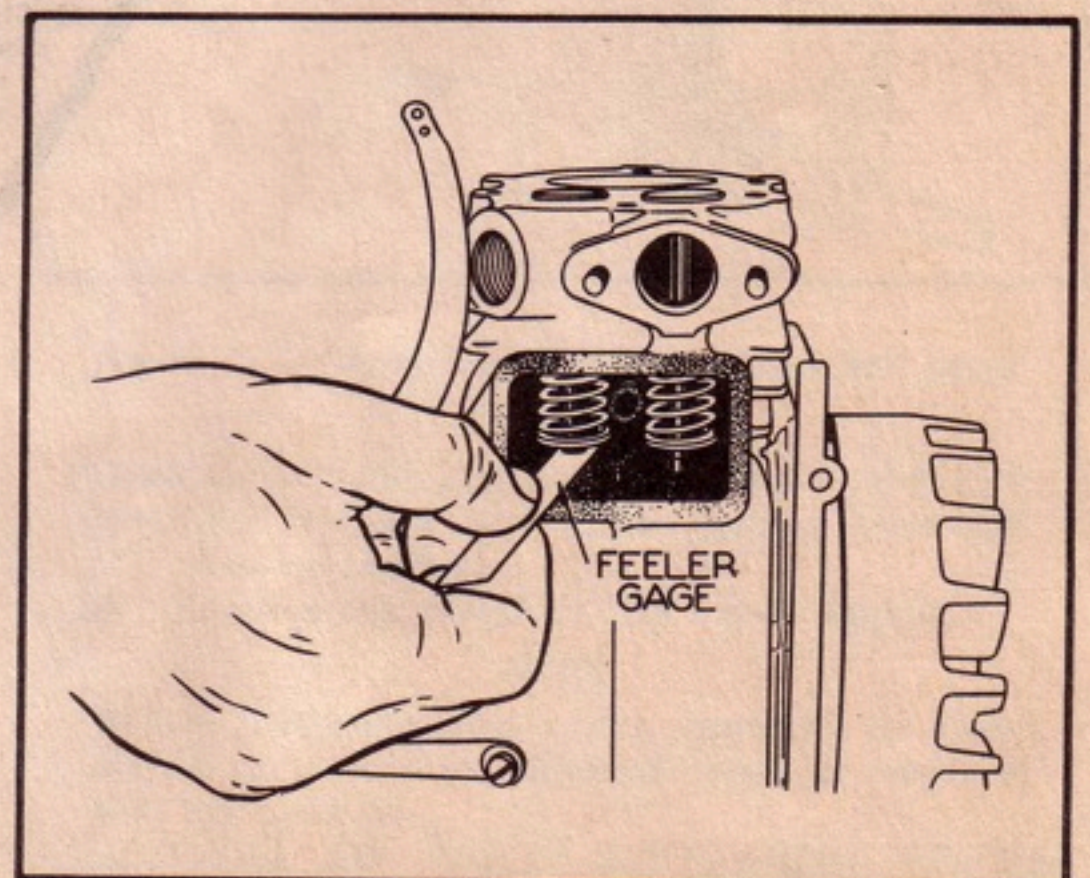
Measuring Tappet Clearance With Feeler Gage
